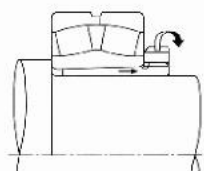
Removal of Withdrawal Sleeve Using Withdrawal Nut (1)
